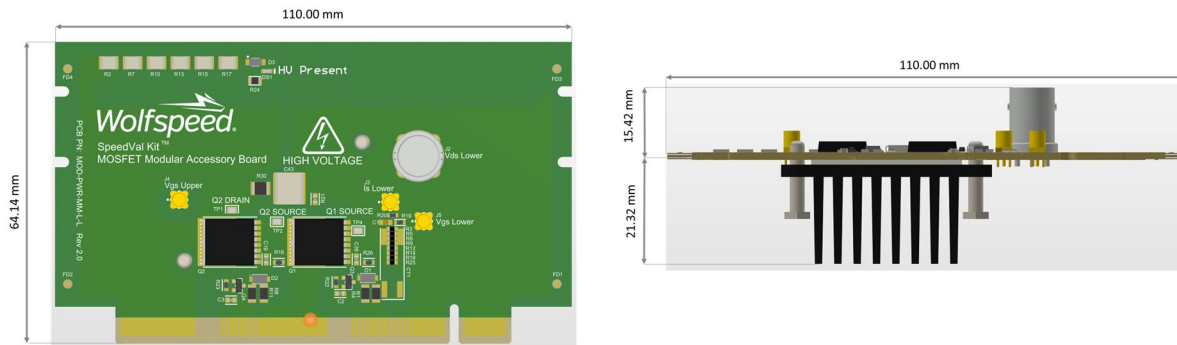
DIMENSIONS OF THE POWER DAUGHTER CARD: TOP VIEW (LEFT) SHOWS THE LENGTH AND WIDTH OF THE BOARD; SIDE VIEW (RIGHT) SHOWS THE LENGTH AND HEIGHT OF THE BOARD.
